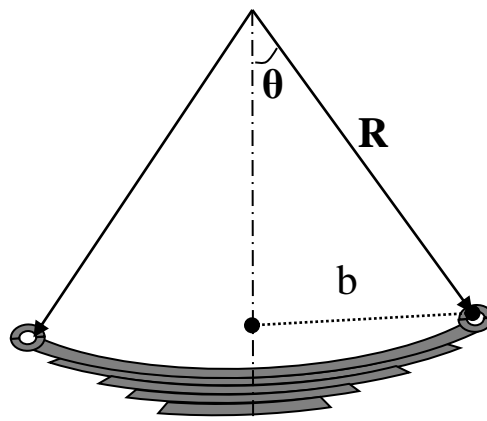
Indicates the shape of leaf spring with major dimensions
